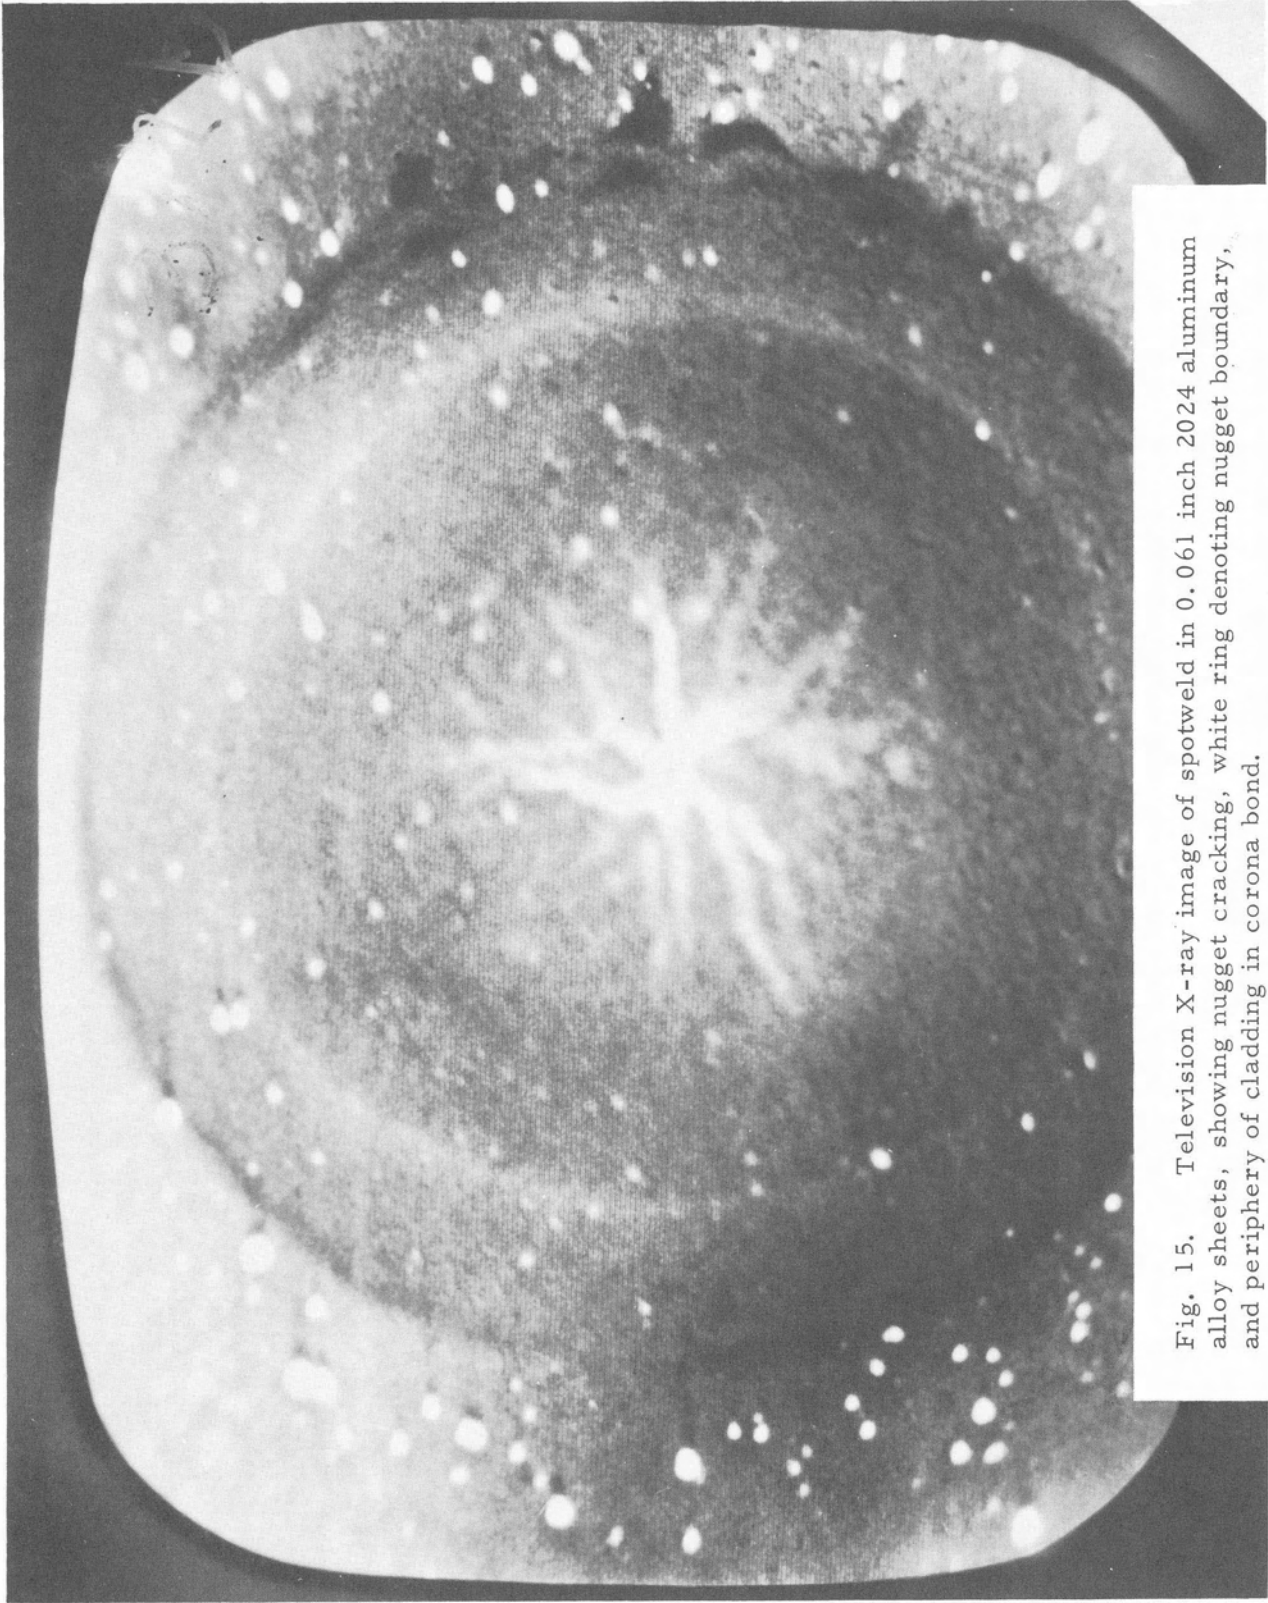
Television X-ray image of spotweld in 0.061 inch 2024 aluminum alloy sheets, showing nugget cracking, white ring denoting nugget boundary, and periphery of cladding in corona bond.
